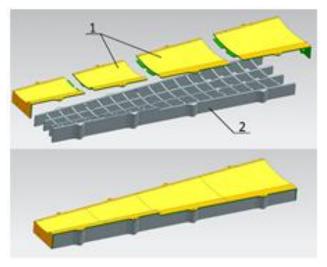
Typical design, matrix of the lower plating of the wing of a light aircraft 1 - shaping elements performed by 3D printing; 2 - power frame
